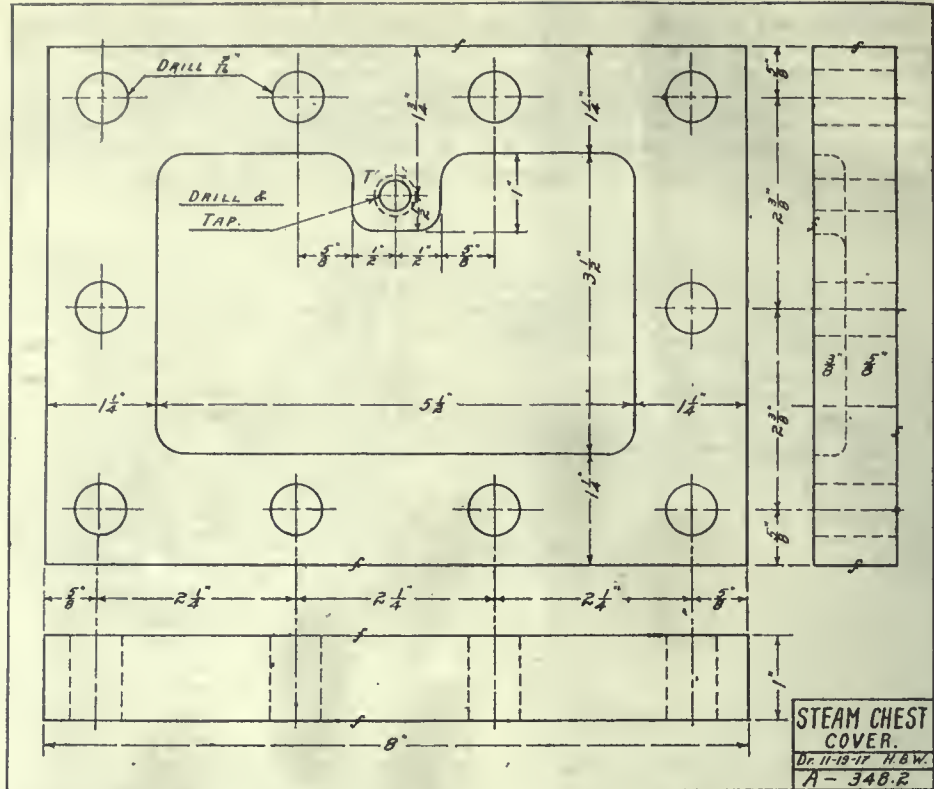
THE COMPLETED WORKING DRAWING OF THE STEAM CHEST COVER.
